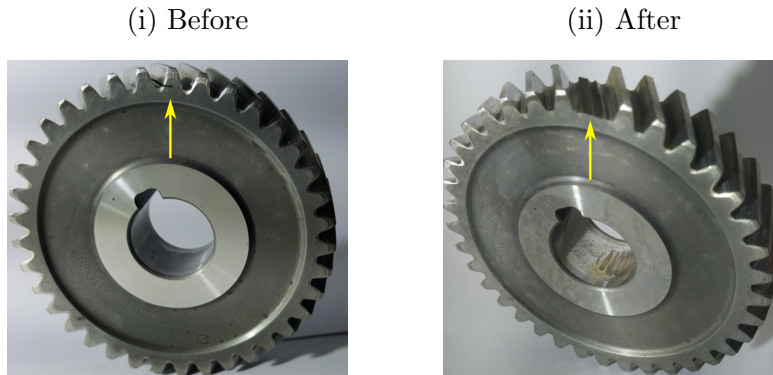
The gear before the fatigue test with the seeded damage and the gear after the fatigue test are presented.
